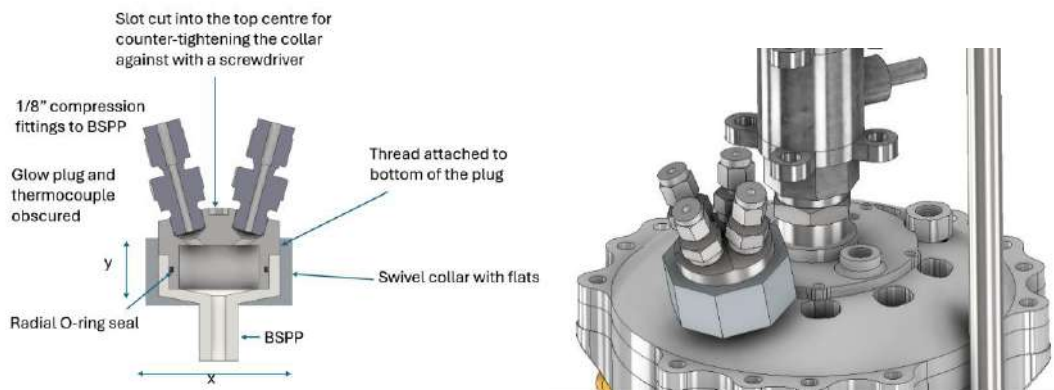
Left: section view of the igniter. Right: assembly of the igniter.
